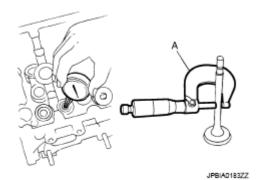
Measuring Diameter Of Valve Stem Using Micrometer Courtesy of NISSAN MOTOR CO., U.S.A.
